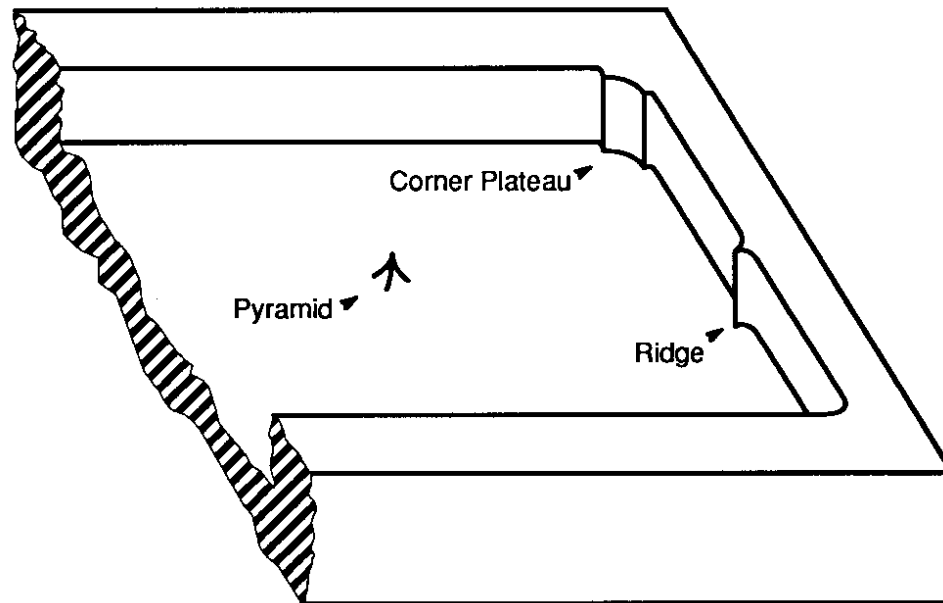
Shapes Resulting from Machined Contours in Milled Pockets
